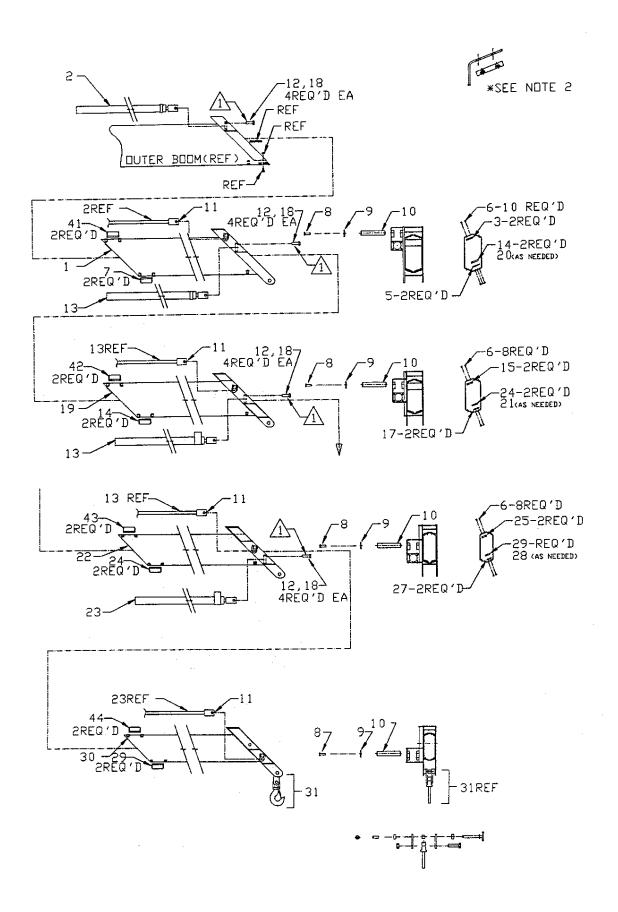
A. EXTENSION BOOM ASSEMBLY - 4H (41710183)
